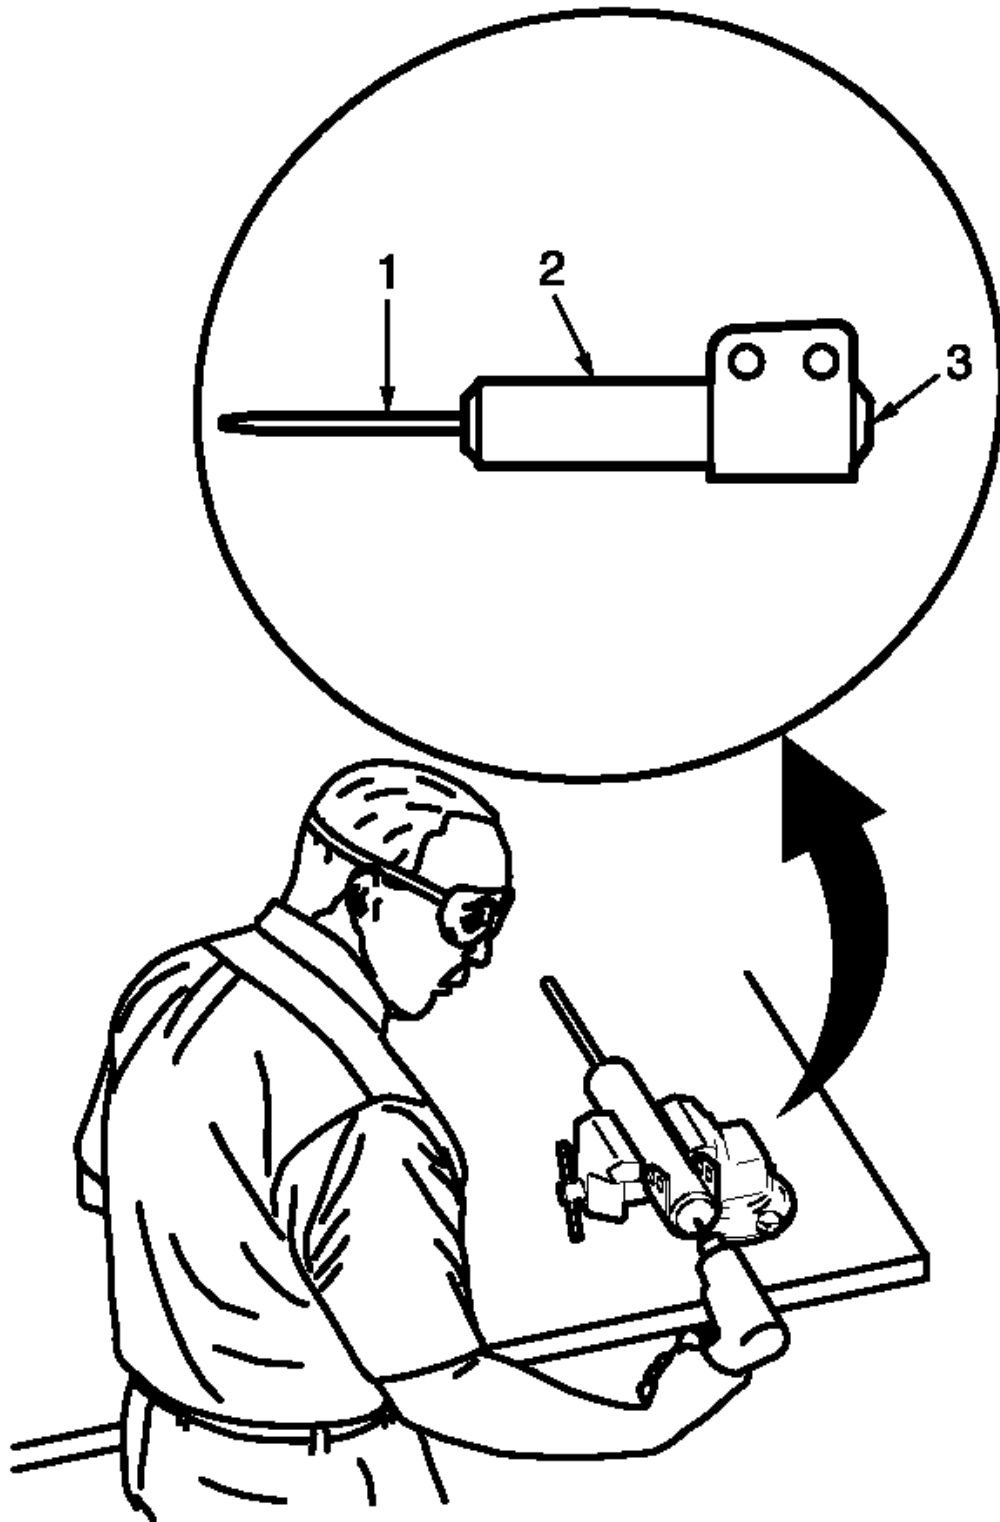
Drilling Hole In Strut At Center Of End Cap
